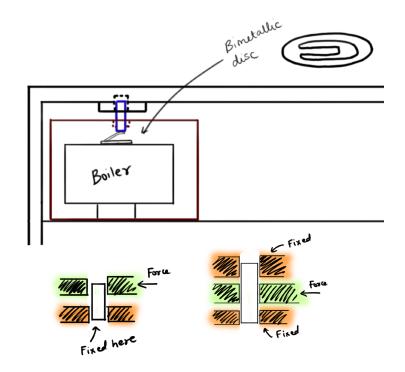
Old design has a lot of space unutilised with the boiler behind the brewing assembly
